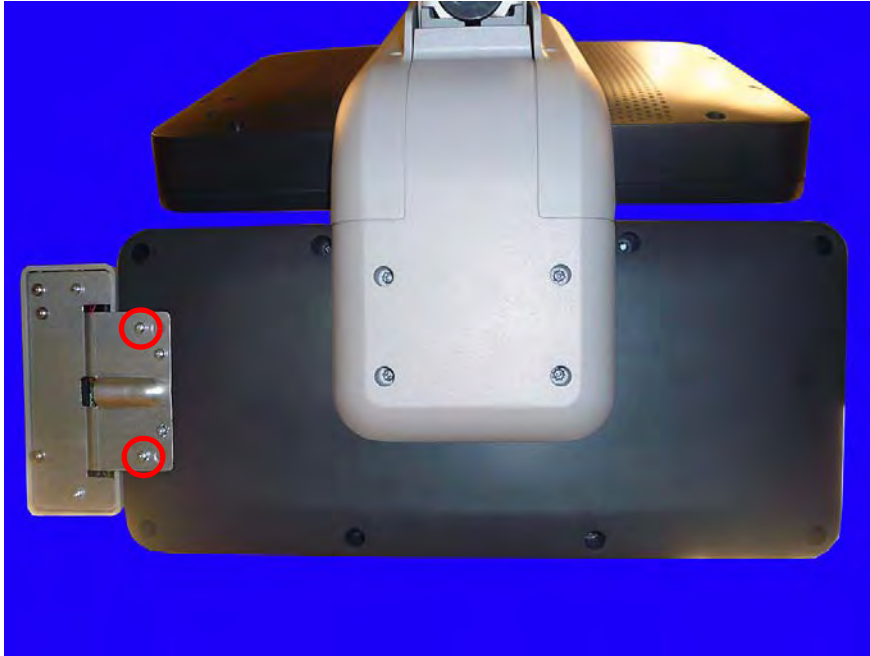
Remove the screws that secure the card reader to the keyboard base
